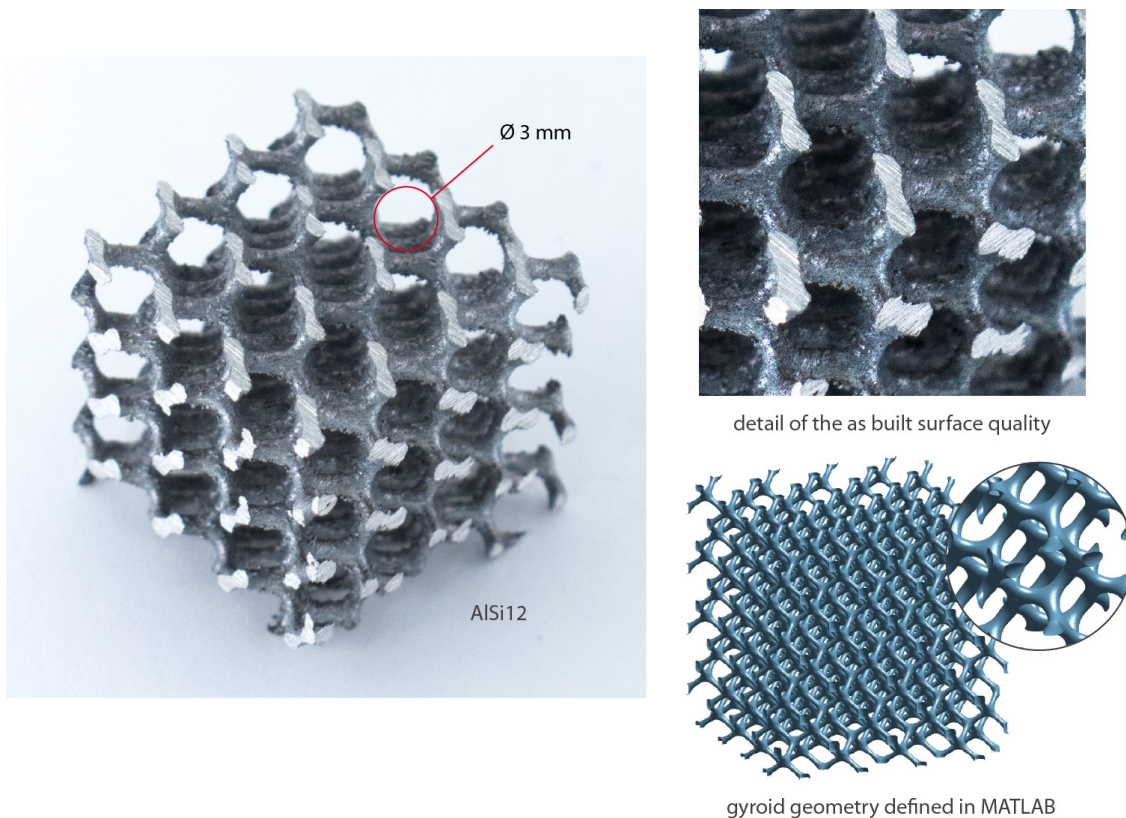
The gyroid test geometry printed in AISi12. The surfaces are quite rough, but the piece was printed fine.
